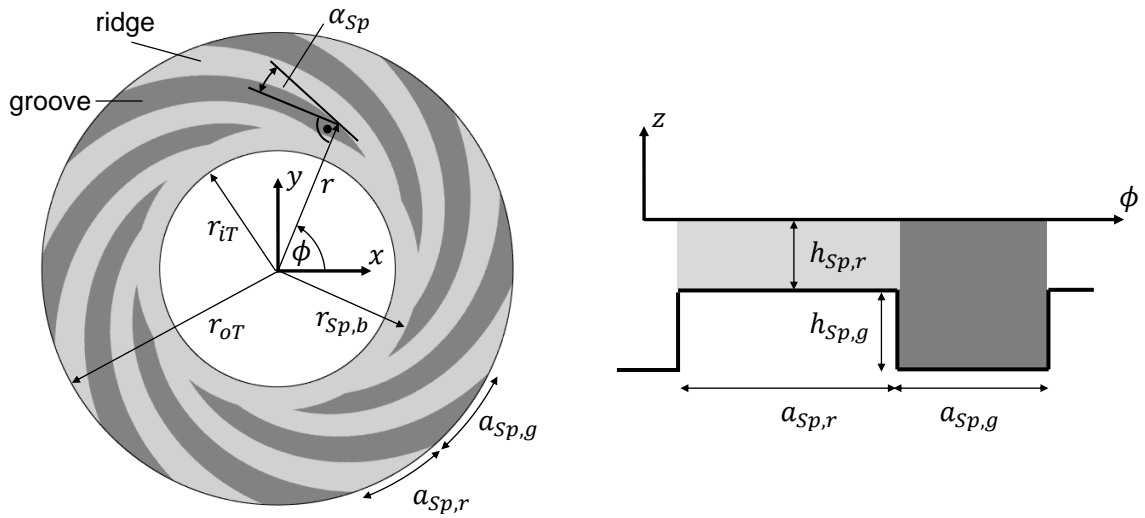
Geometrical parameters of a spiral groove thrust bearing.
